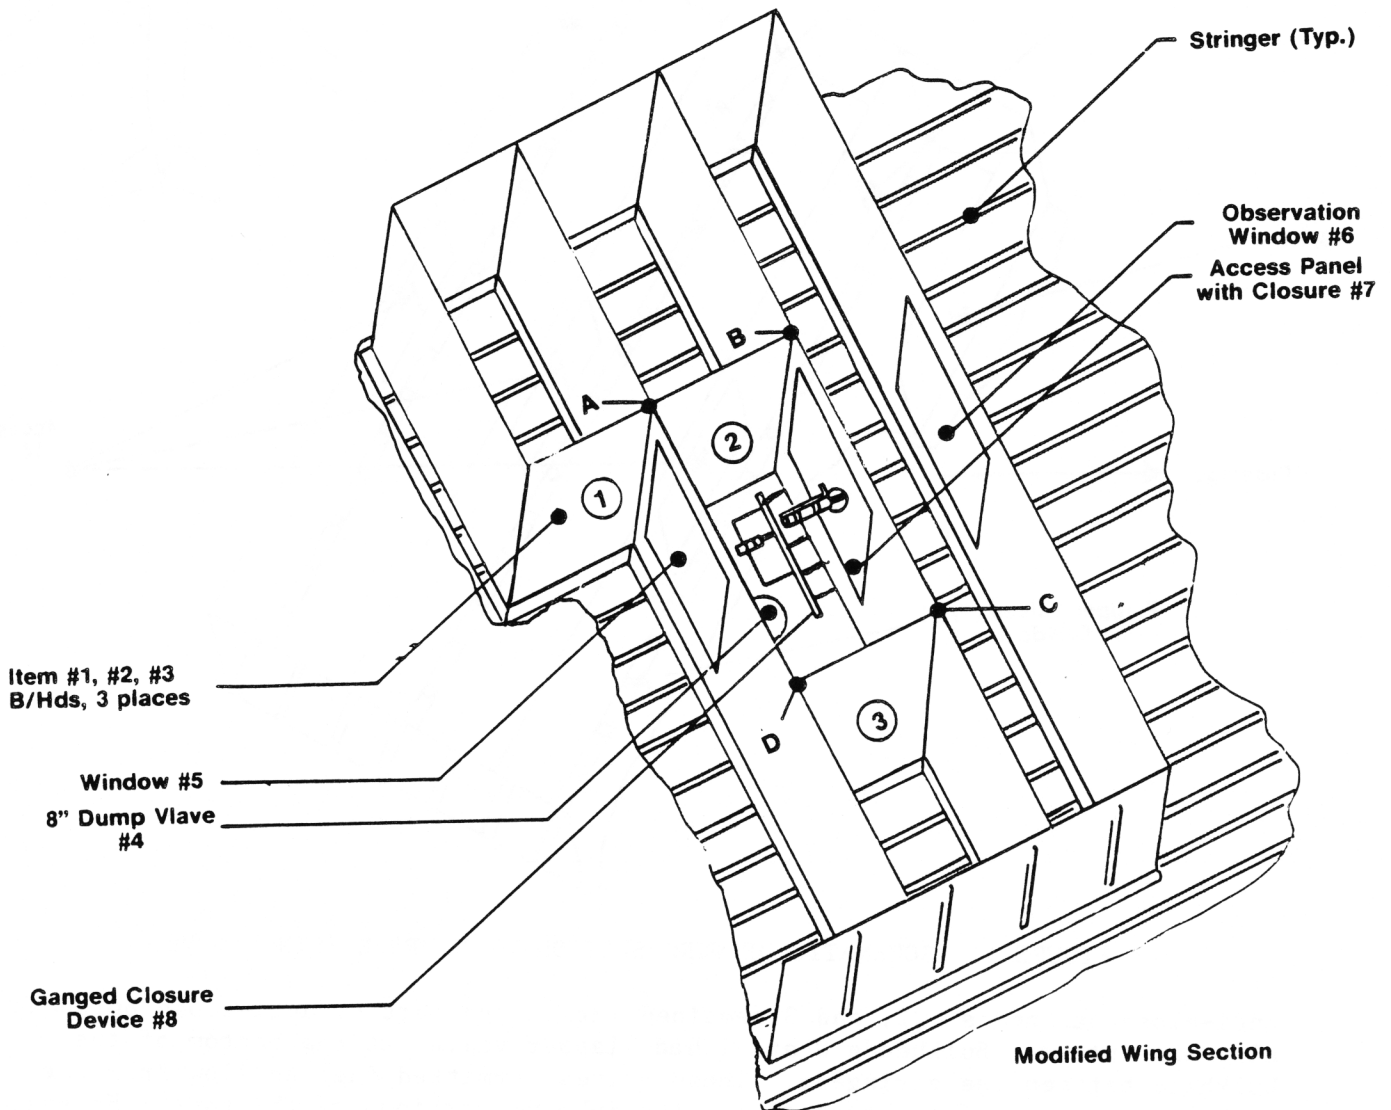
WING SECTION MODIFIED TO INCORPORATE THE CONTAINMENT SYSTEM
